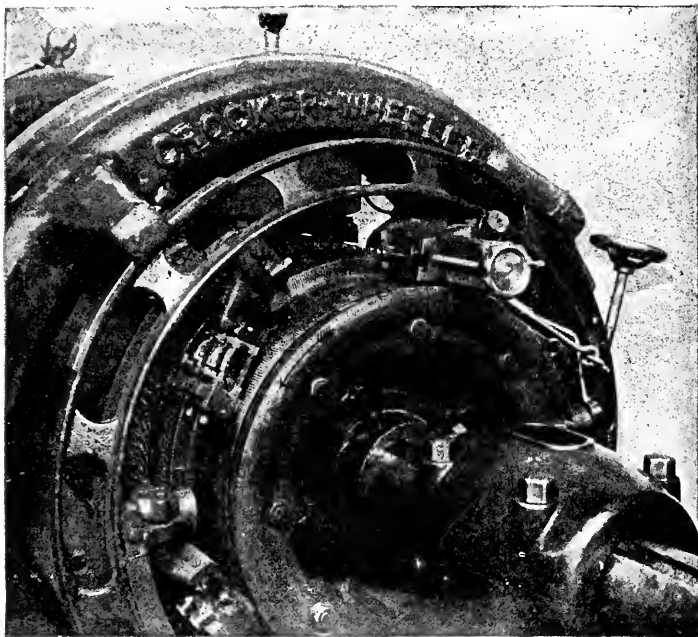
If a commutator becomes badly worn the armature may be taken out and put in a lathe for re-finishing the commutator, if the machine is a small one; for a larger one a commutator turning tool may be mounted right on the brush rigging, as shown here.
